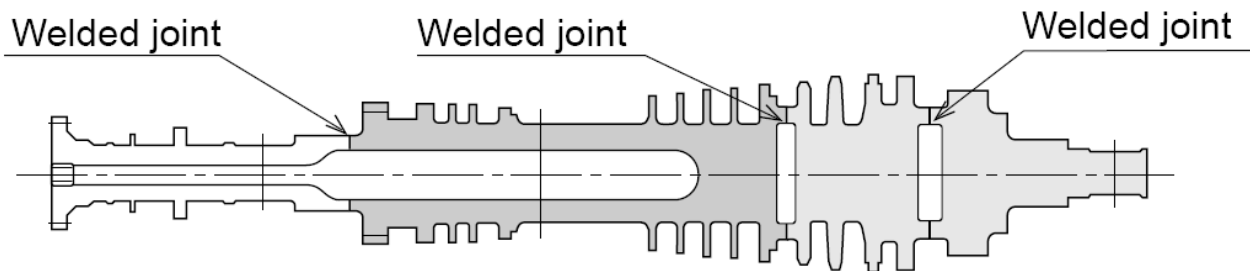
Welded steam turbine rotor – Mitsubishi Heavy Industry Ltd. [Takashi et al. 2001]
